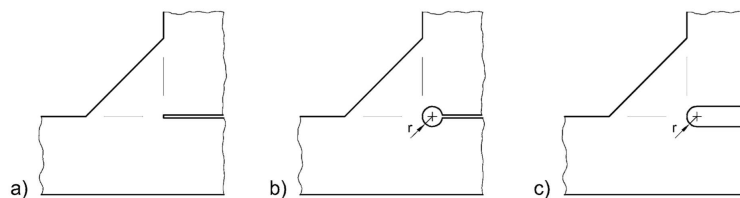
Rounding of weld root of non penetrating fillet weld by a keyhole and an U-shaped notch [2].
